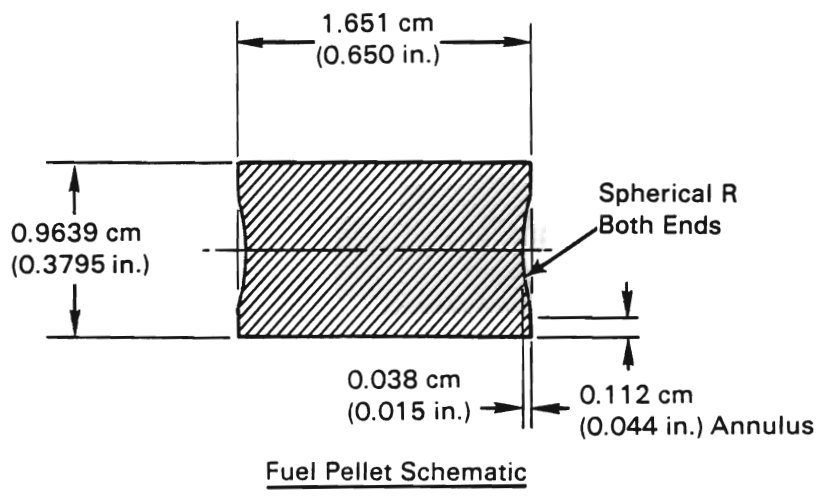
ATM-106 Pellet and Fuel Rod Dimensions
